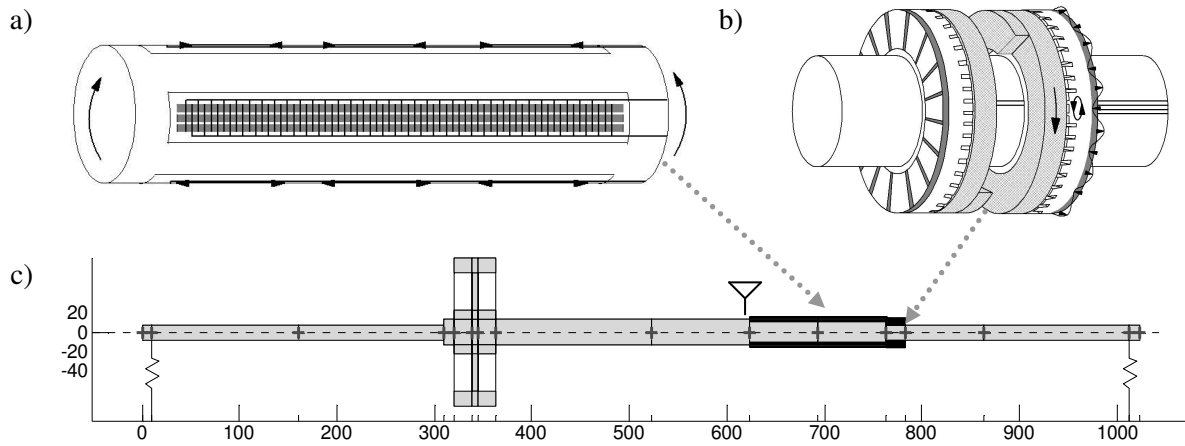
a) MFC force actuator (drawing). b) PUM mass actuator (drawing).
